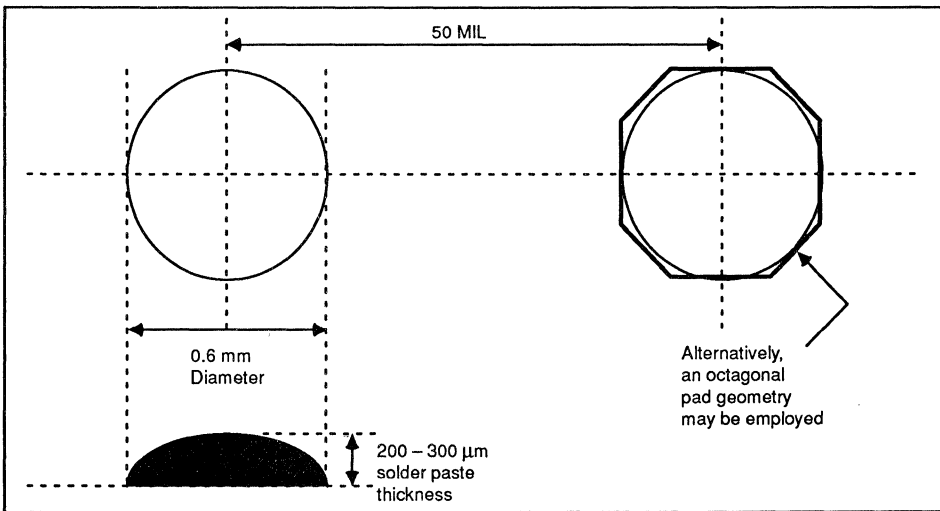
Solder Pad Design for Surface Mount Pin Grid Arrays
